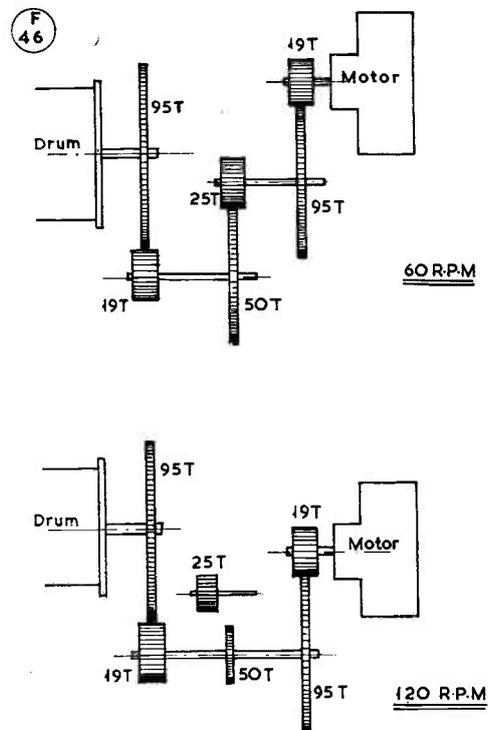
Sketch showing gear layout and tooth ratios to get correct turning speeds — see text.
